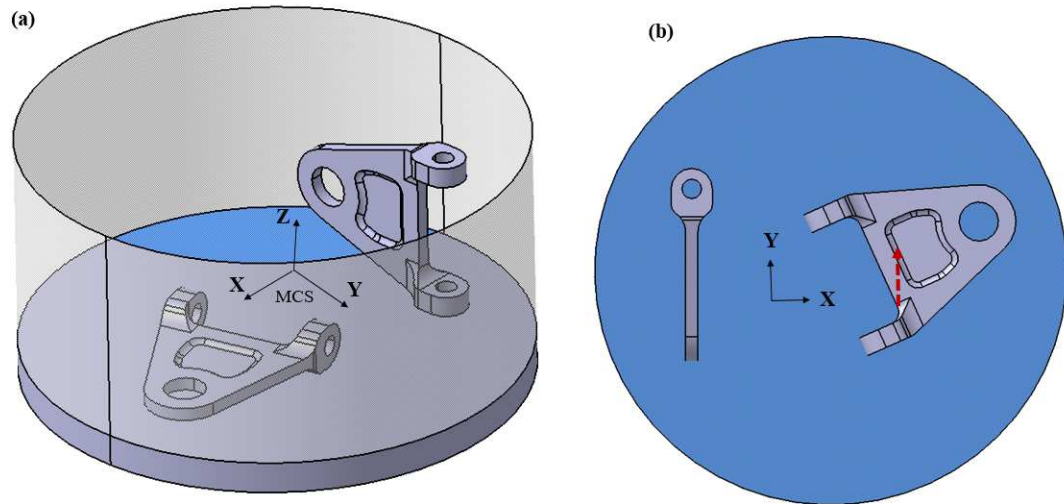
Desired locations for the vertical and horizontal parts according to machine/work coordinate system (a) isometric view on machine (b) top view on machine
